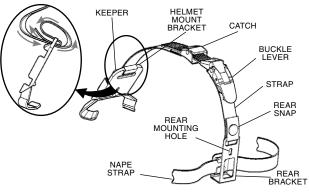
INSTALLATION OF HELMET MOUNT
